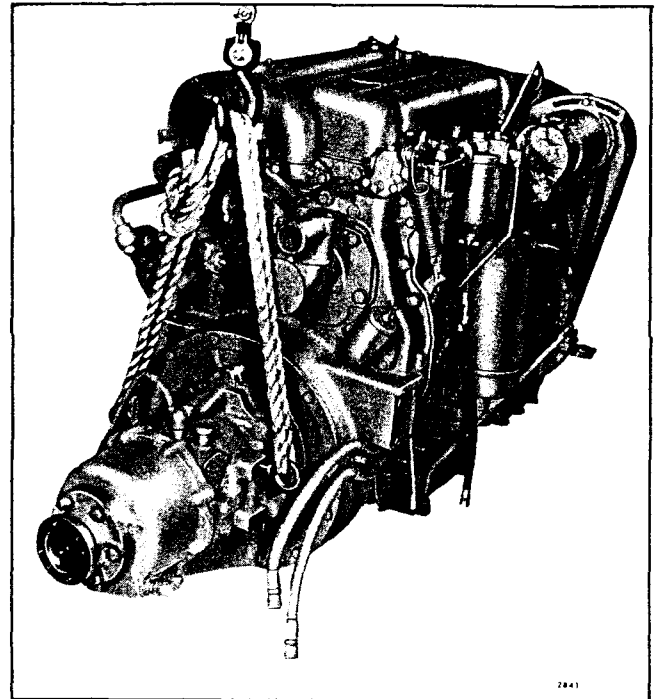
Removing Reverse and Reduction Gear Assembly from Engine
